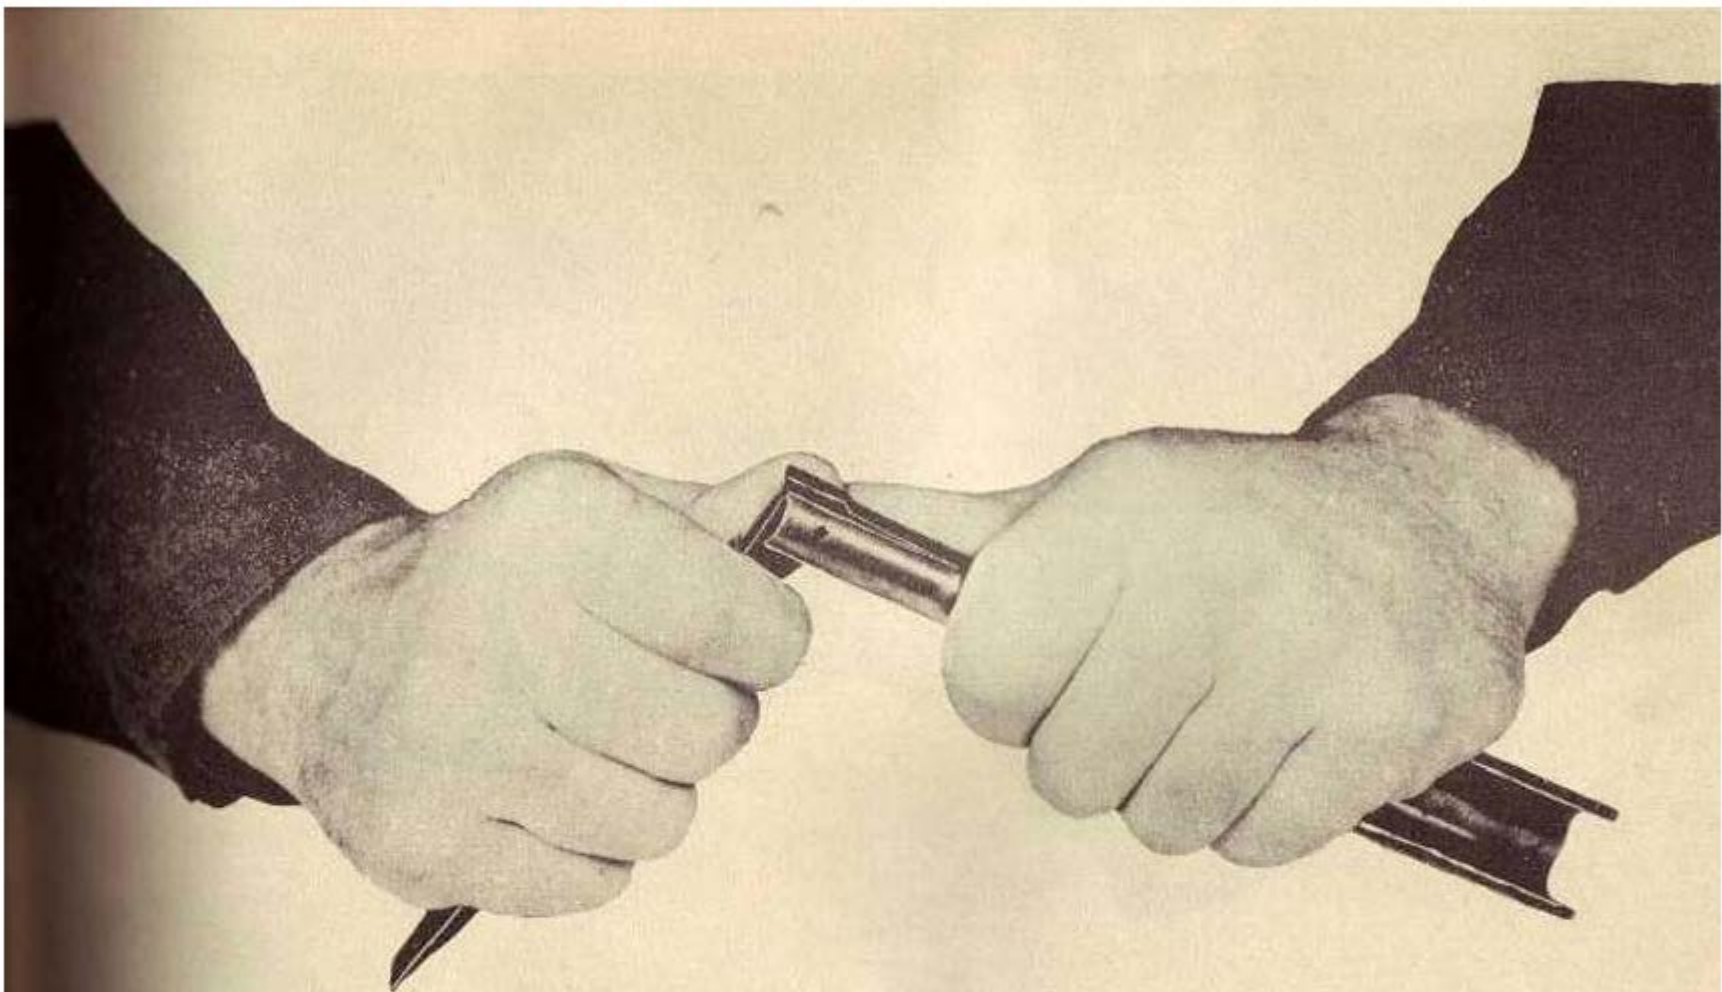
Insert a combination tool (or flange of ACTUATOR) under the head of the EXTRACTOR on the face of the bolt and pull EXTRACTOR out and up to withdraw it from its groove. (Note: Do not lift EXTRACTOR higher than necessary for lug to clear anchorage hole as otherwise setting or breaking may occur).
